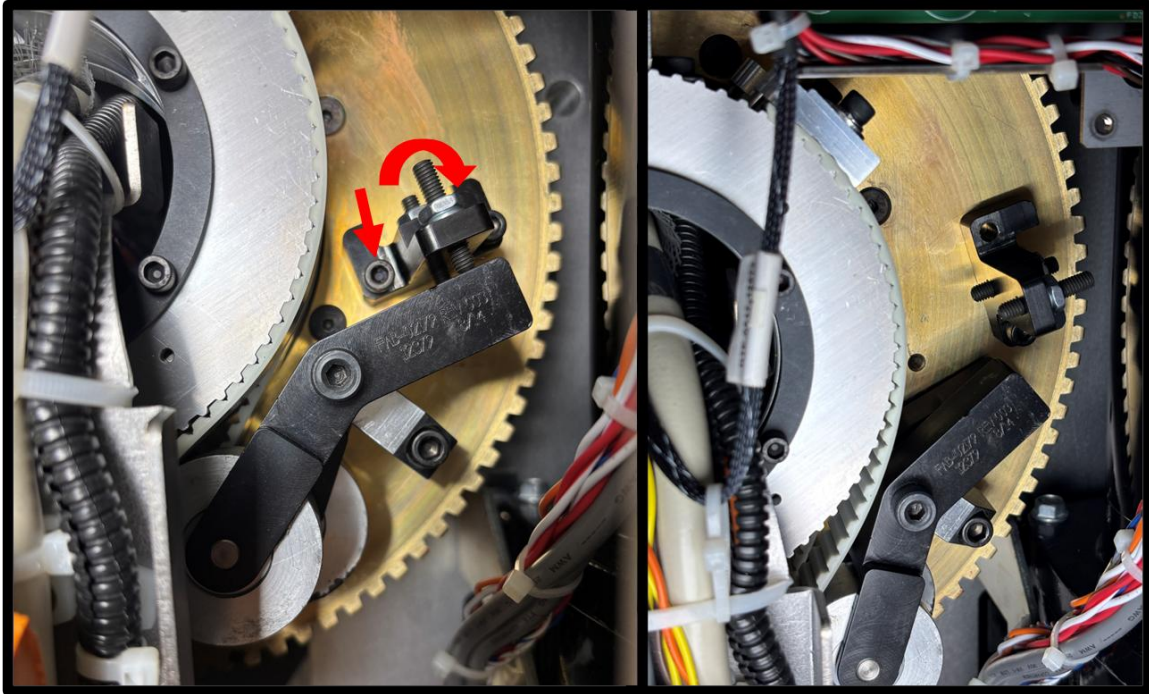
Tensioner Mount before (left) and after repositioning (right)
